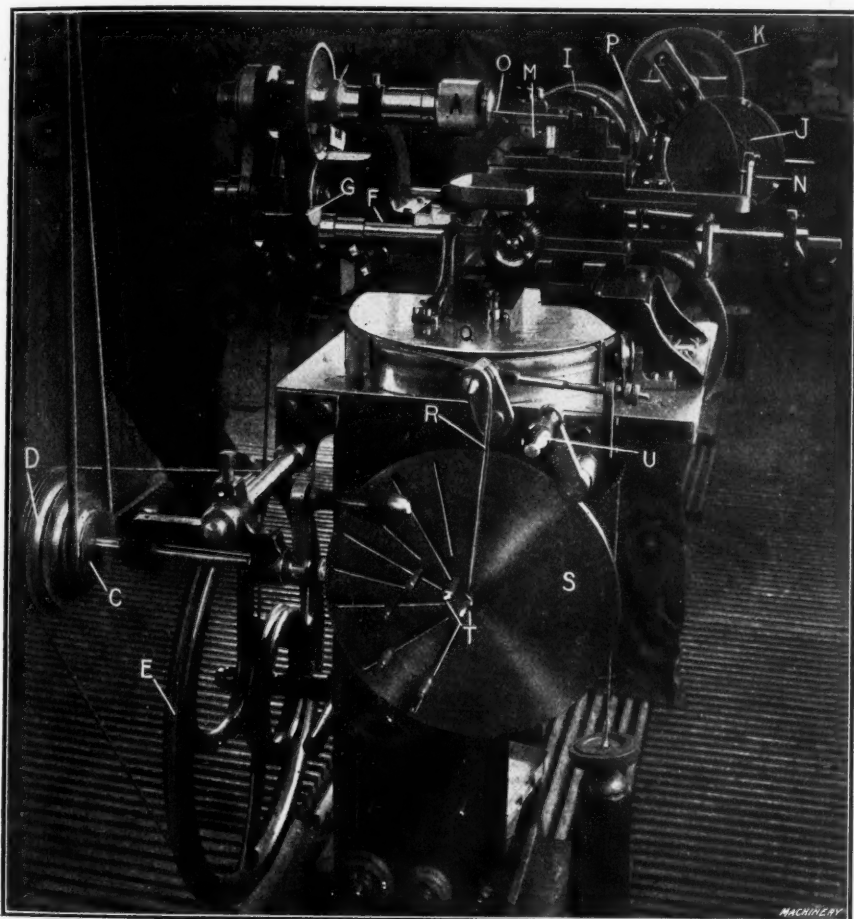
Swiss "Brocade" Machine, which produces Special Designs of Engine Turning
